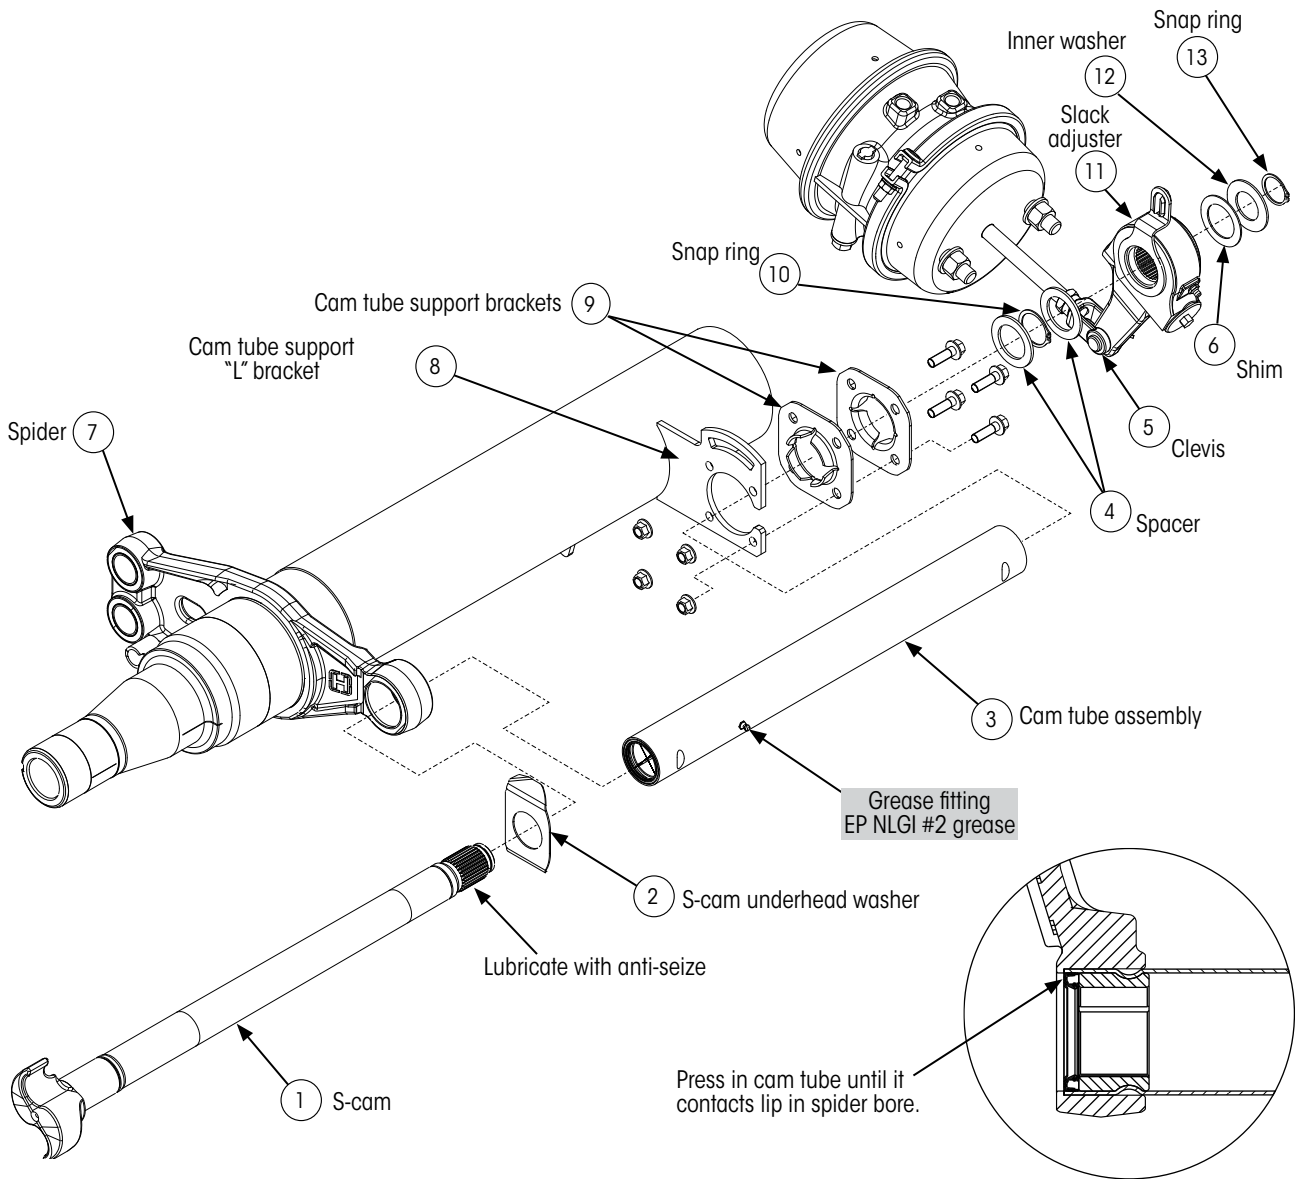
Trlaxle® weld-mount cam tube assembly
